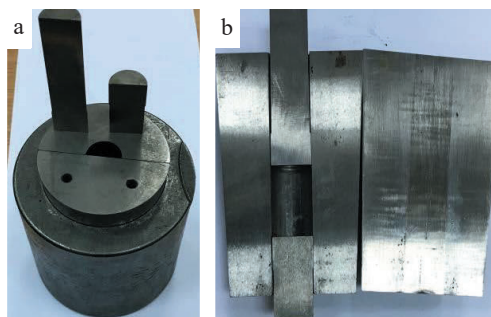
The mold for preparing samples: a – assembled; b – cross-section
